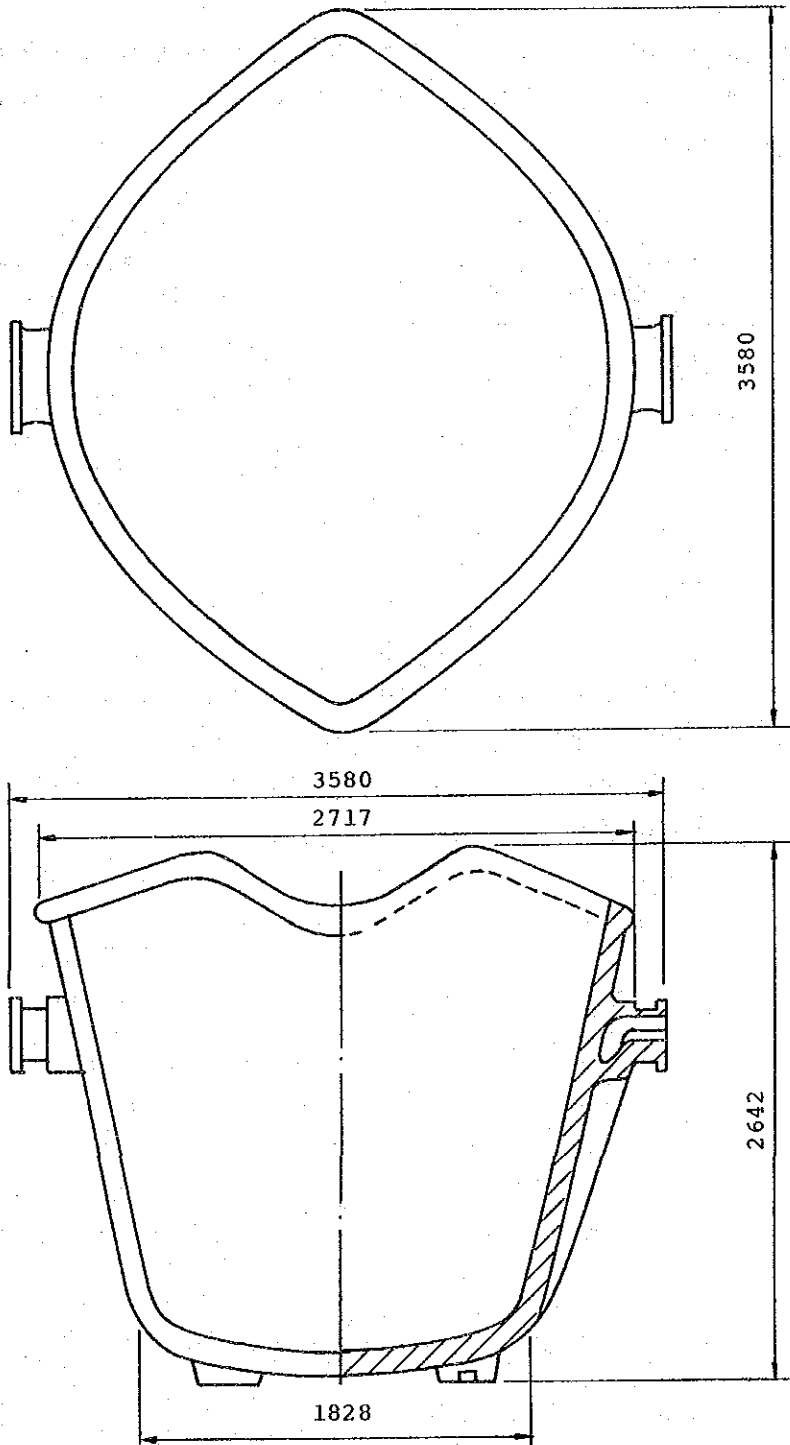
(5/5) Representative part requiring overlay welding—Ladle
